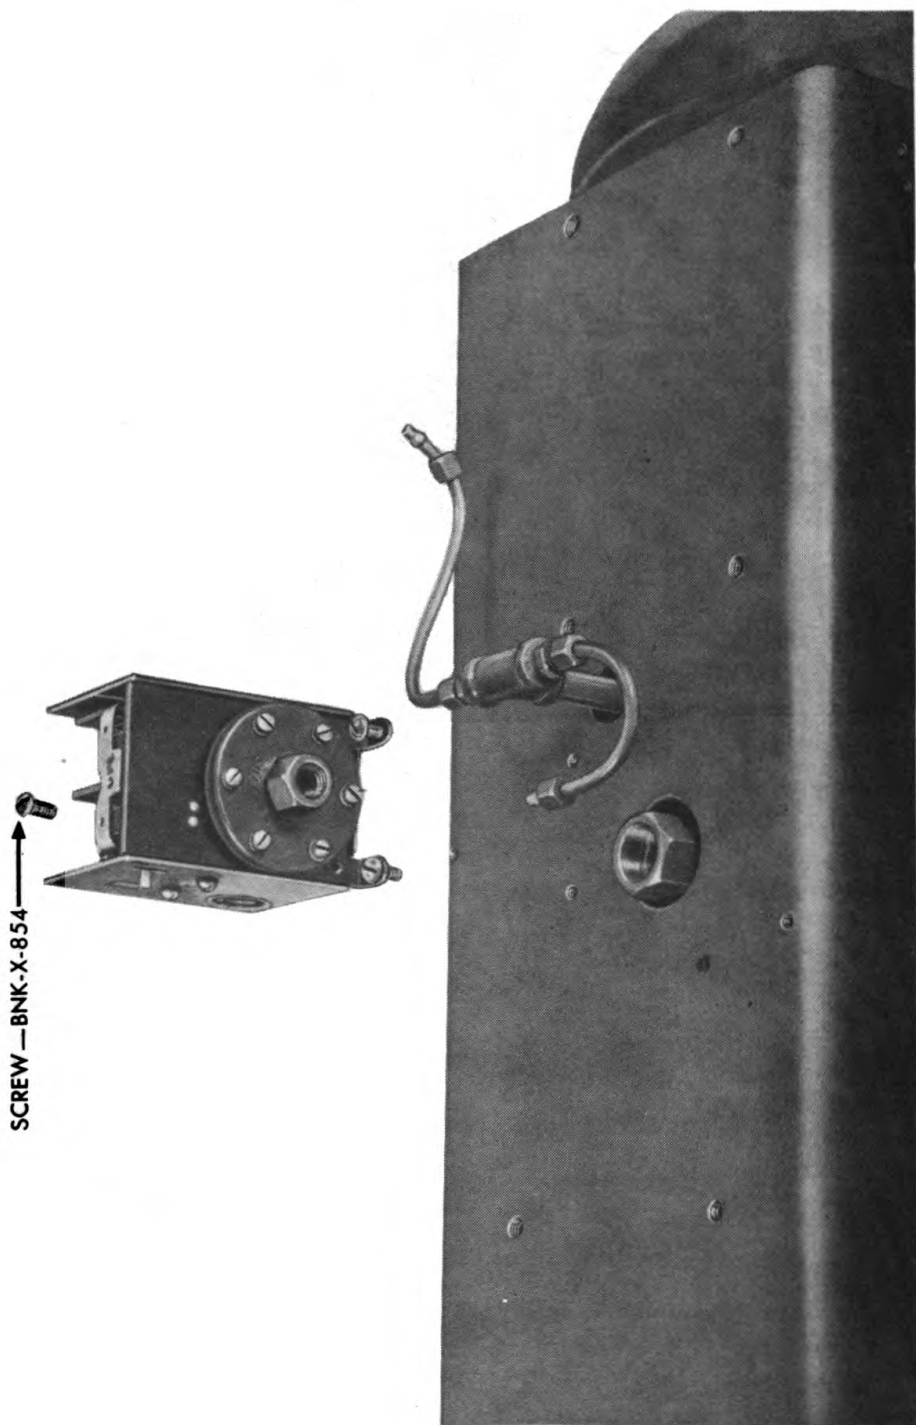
Cut-off Switch Removed From Air Compressor Tank
